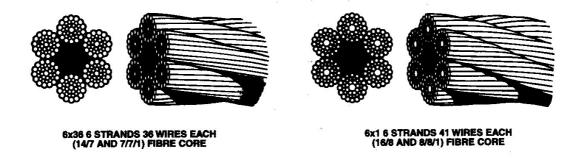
Construction of 6x36 and 6x41 Steel Wire Rope
